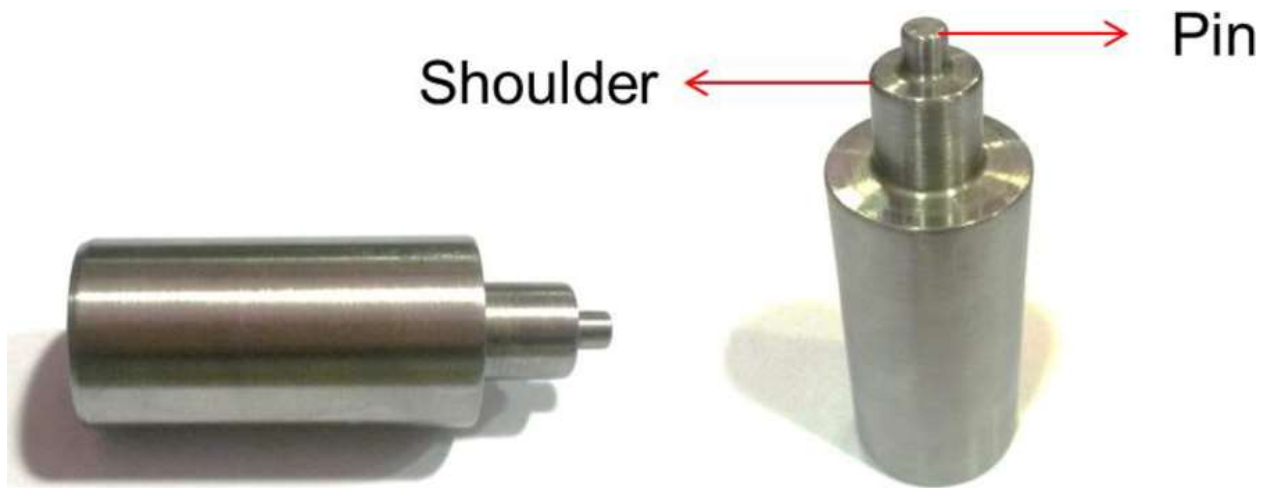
The Friction Stir Welding Tool (Mubiaya and Akinlabi, 2013)[13].
